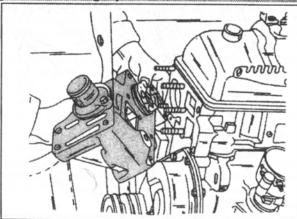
The water pump must be removed or installed at the angle shown.
